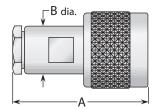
(Solder-clamp; gold-plated ferrule, nickel-plated body)
